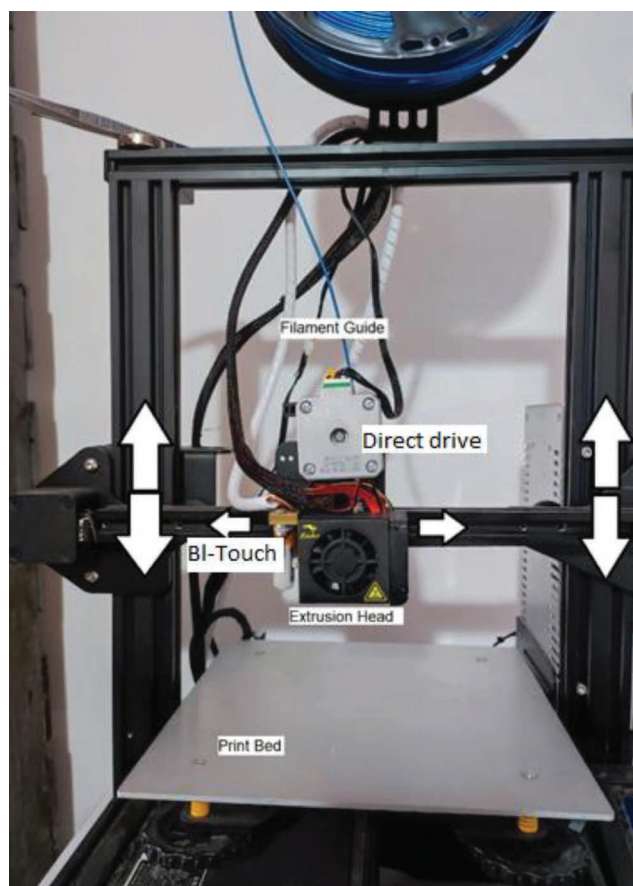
Customized Ender 3 3D printer utilized to 3D print the coatings. Various components of the printer are shown, including the filament guide, direct drive extrusion head, print bed, and the (white arrows) of motion of the stepper motors.
